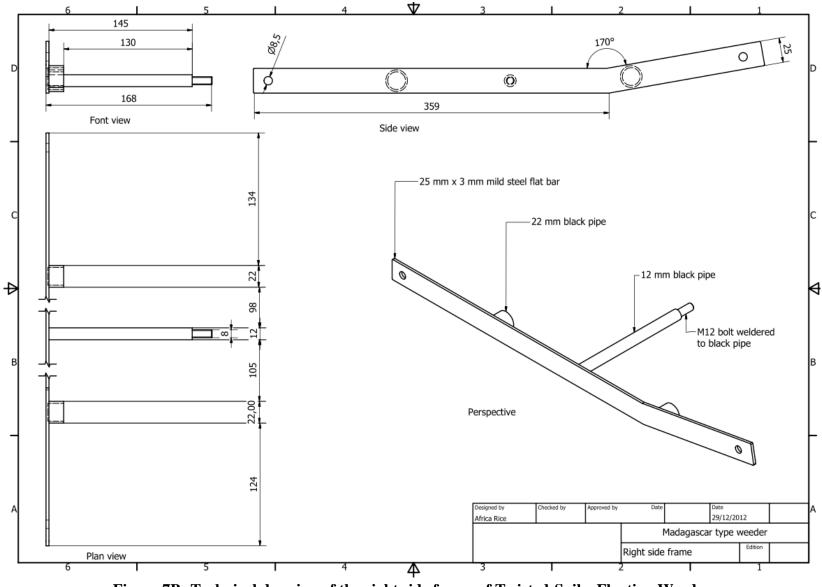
B: Technical drawing of the right side frame of Twisted-Spike Floating Weeder
